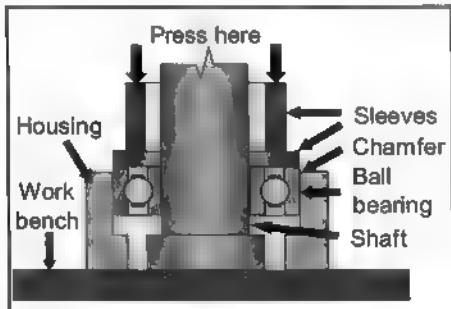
Simultaneously pressing the bearing onto its shaft and into its housing.
